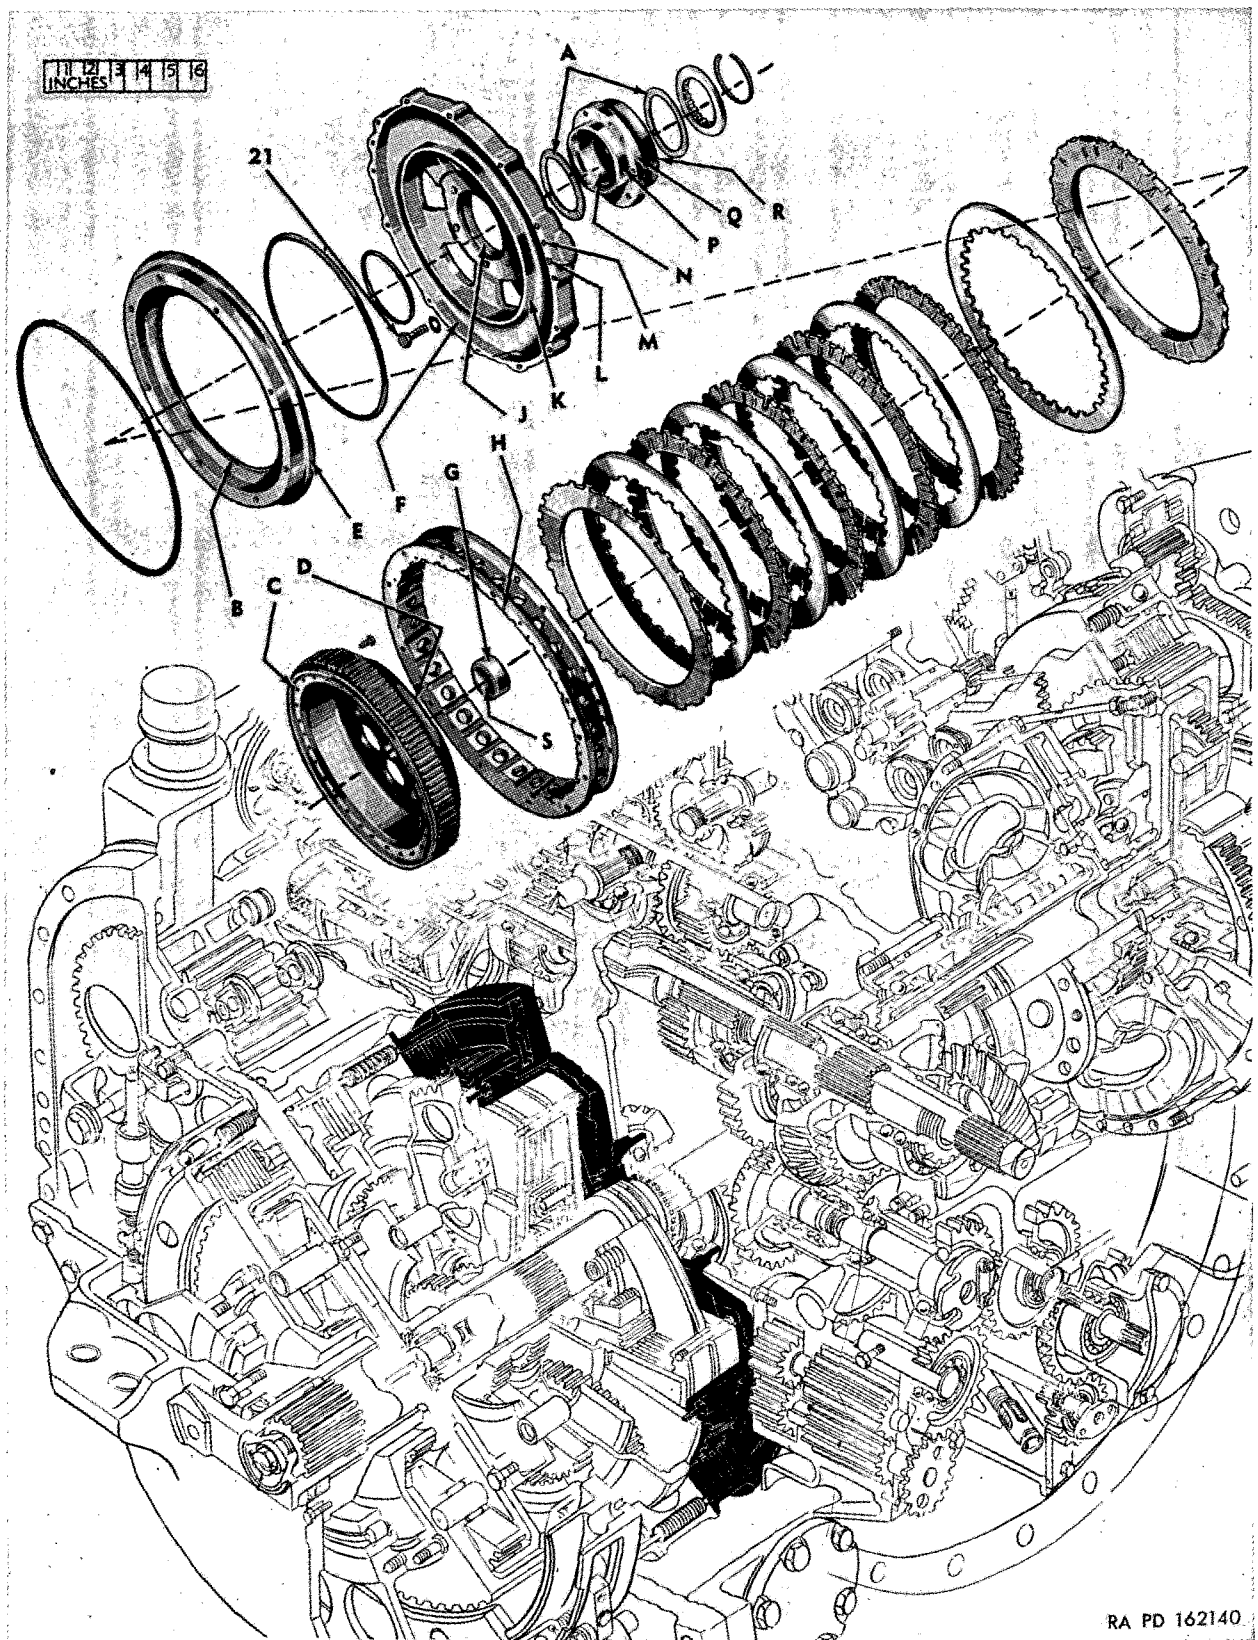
Serviceability standard points of measurement for right end plate and drive clutch package unit.
